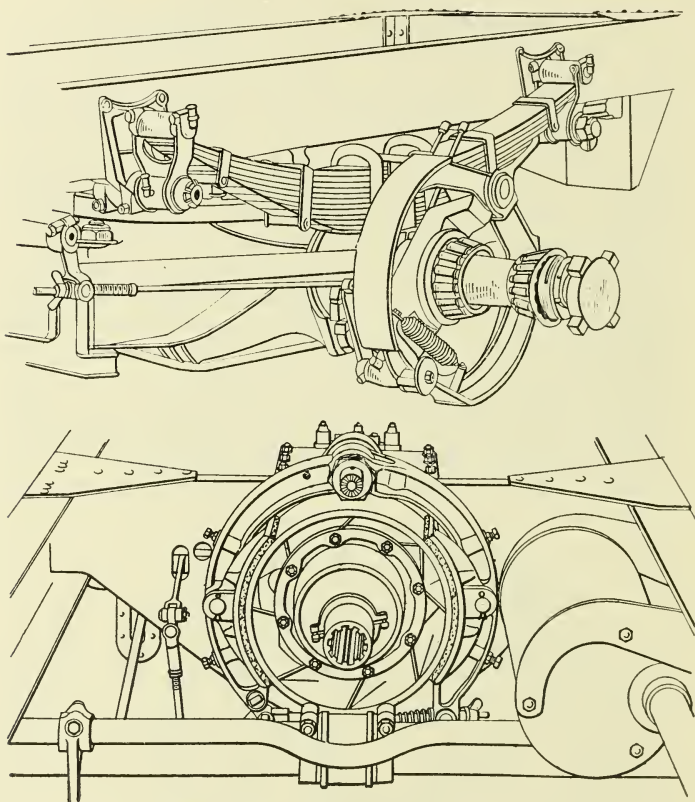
TWO VIEWS OF THE BRAKE USED BY THE PACKARD COMPANY
